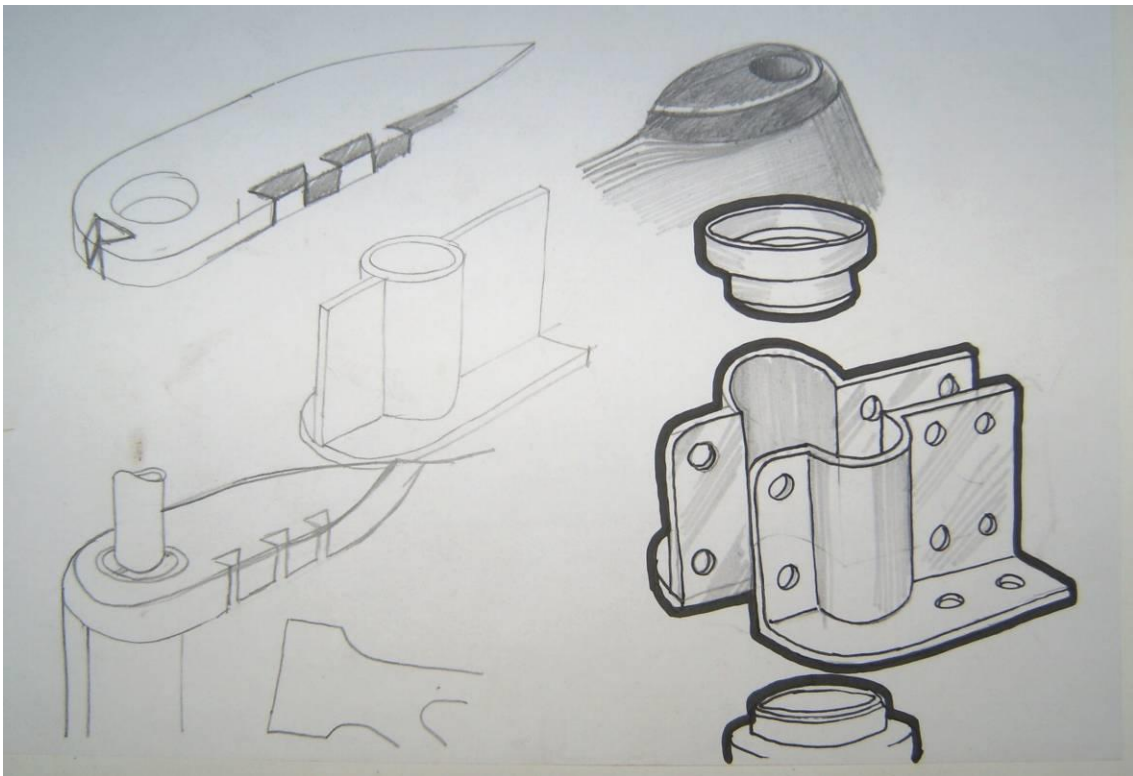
Initial Design Sketches for Head Tube Fitting – Taylor, Nicholas 2005
